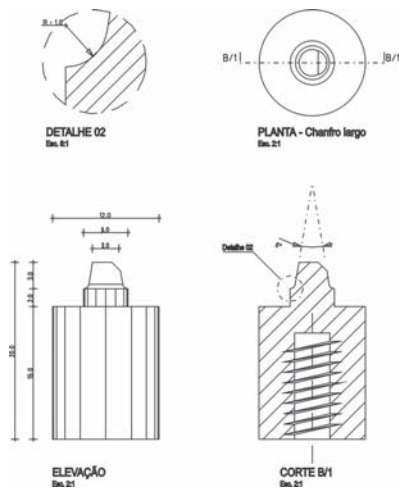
A diagram of the stainless steel die master with a chamfer margin (mm).
